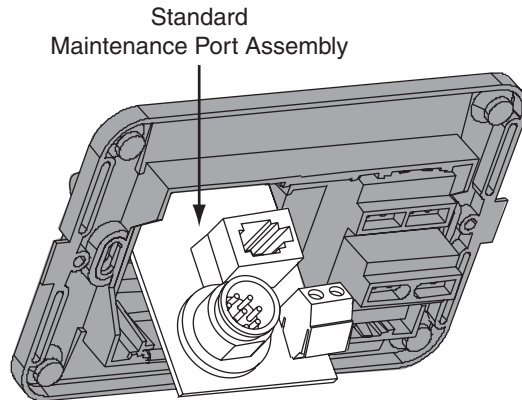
Detaching the Standard Maintenance Port Assembly
